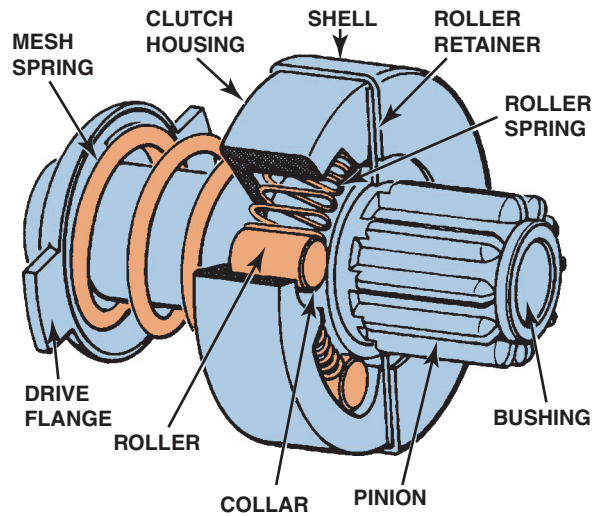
A cutaway of a typical starter drive showing all of the internal parts.
